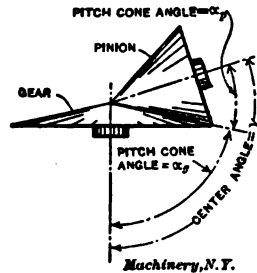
Pitch Cones of Gears Shown in Fig. 1
